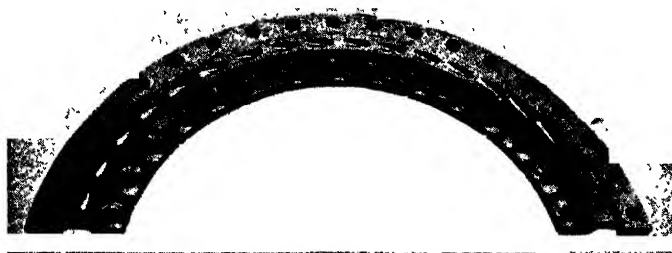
Nozzle plate for astern turbine. (*Allis-Chalmers Manufacturing Company.*)
